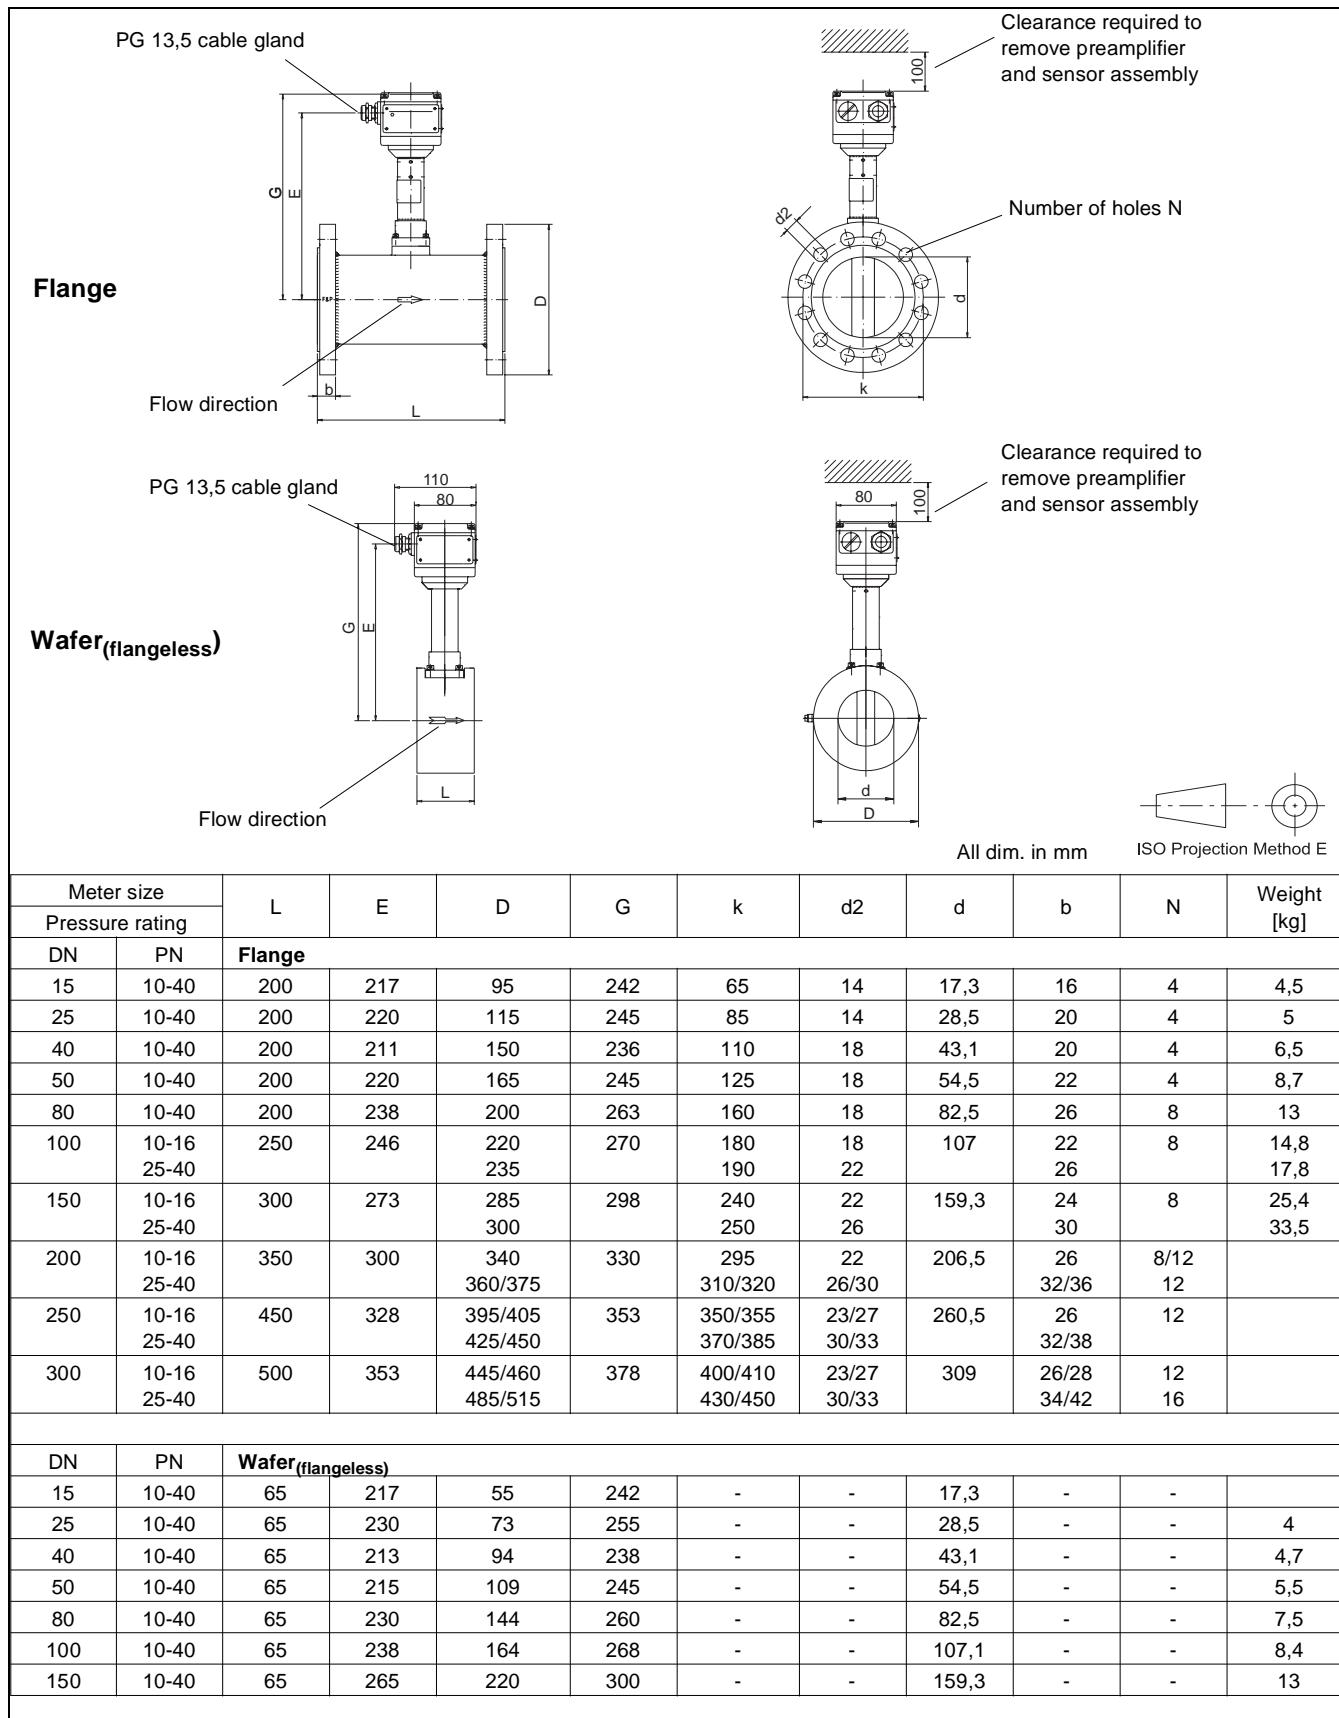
Dimension drawings of VORTEX-VM primary, DIN
